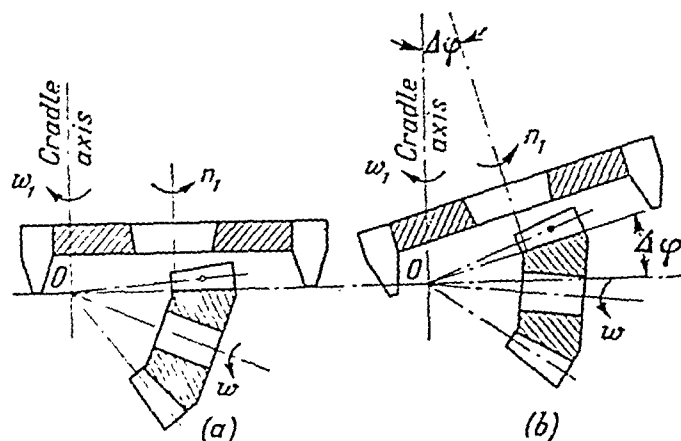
Arrangements of the gear blank and the face-mill type cutter in relation to the cradle axis
